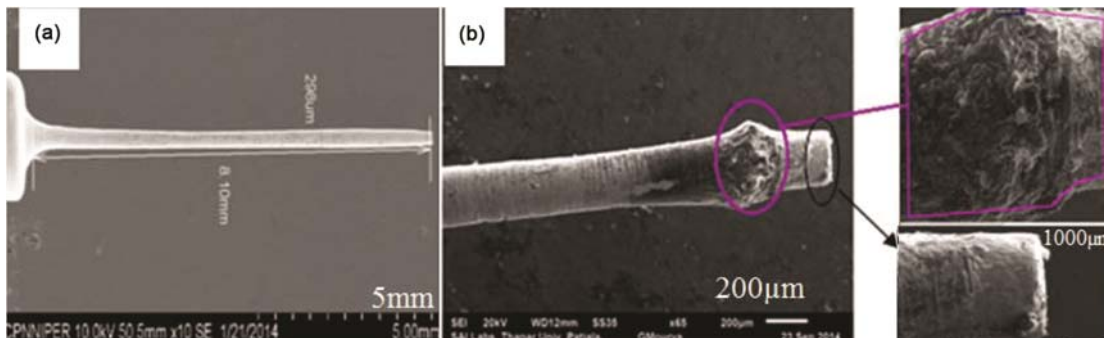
SEM of fabricated micro tool (a) Before machining and (b) After machining.
